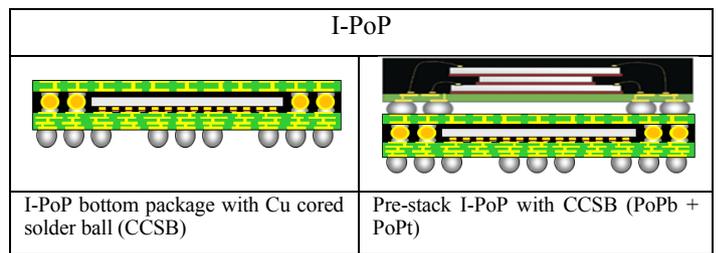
Schematic of interposer package-on-package with Cu cored solder ball (I-PoP with CCSB)
